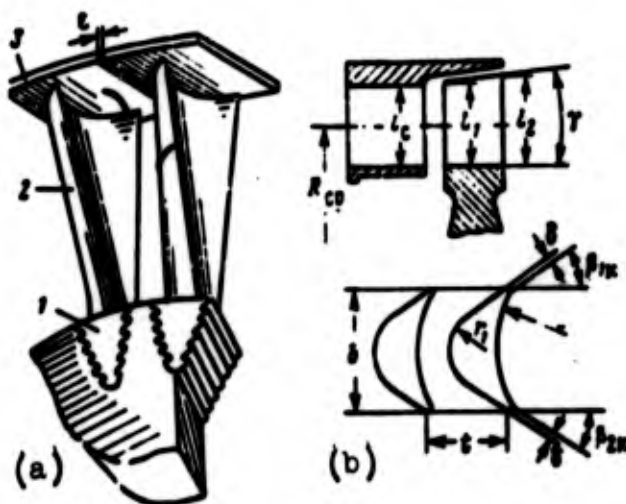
Turbine blades of a turbopump assembly (a) and diagram for determination of blade dimensions (b): 1 — root; 2 — foil; 3 — shroud.
